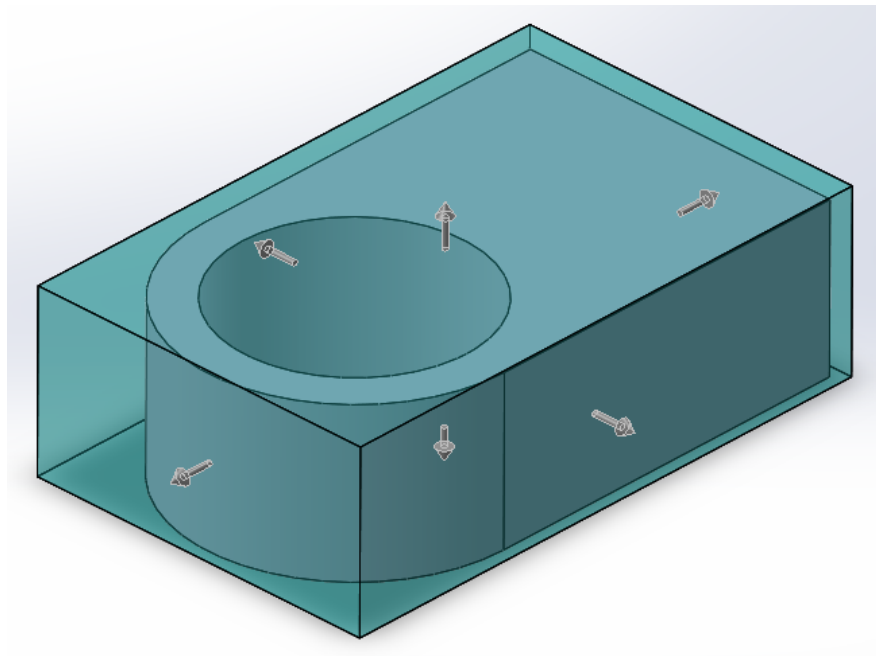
Milling process for top and side surfaces, drilling for hole of the gripper
